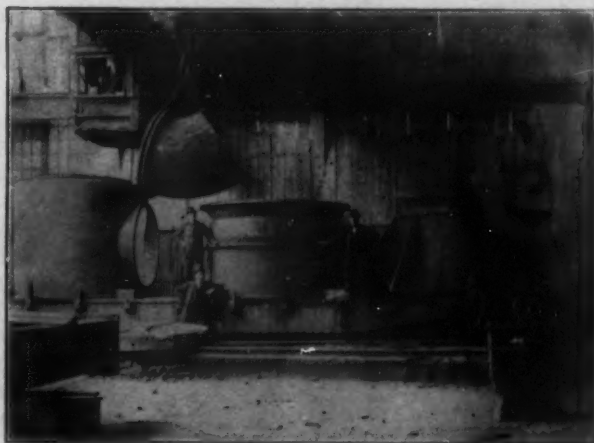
Sugar Mill Vacuum Pans Being Loaded for Shipping.
